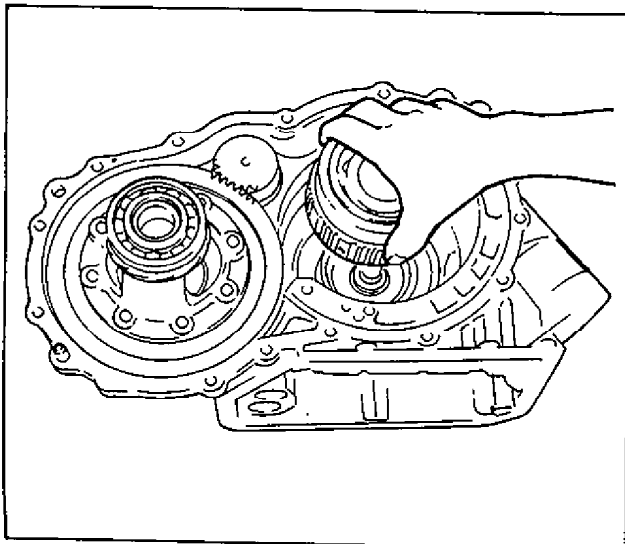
B-197 Installing Rear Planetary Gear Assembly
